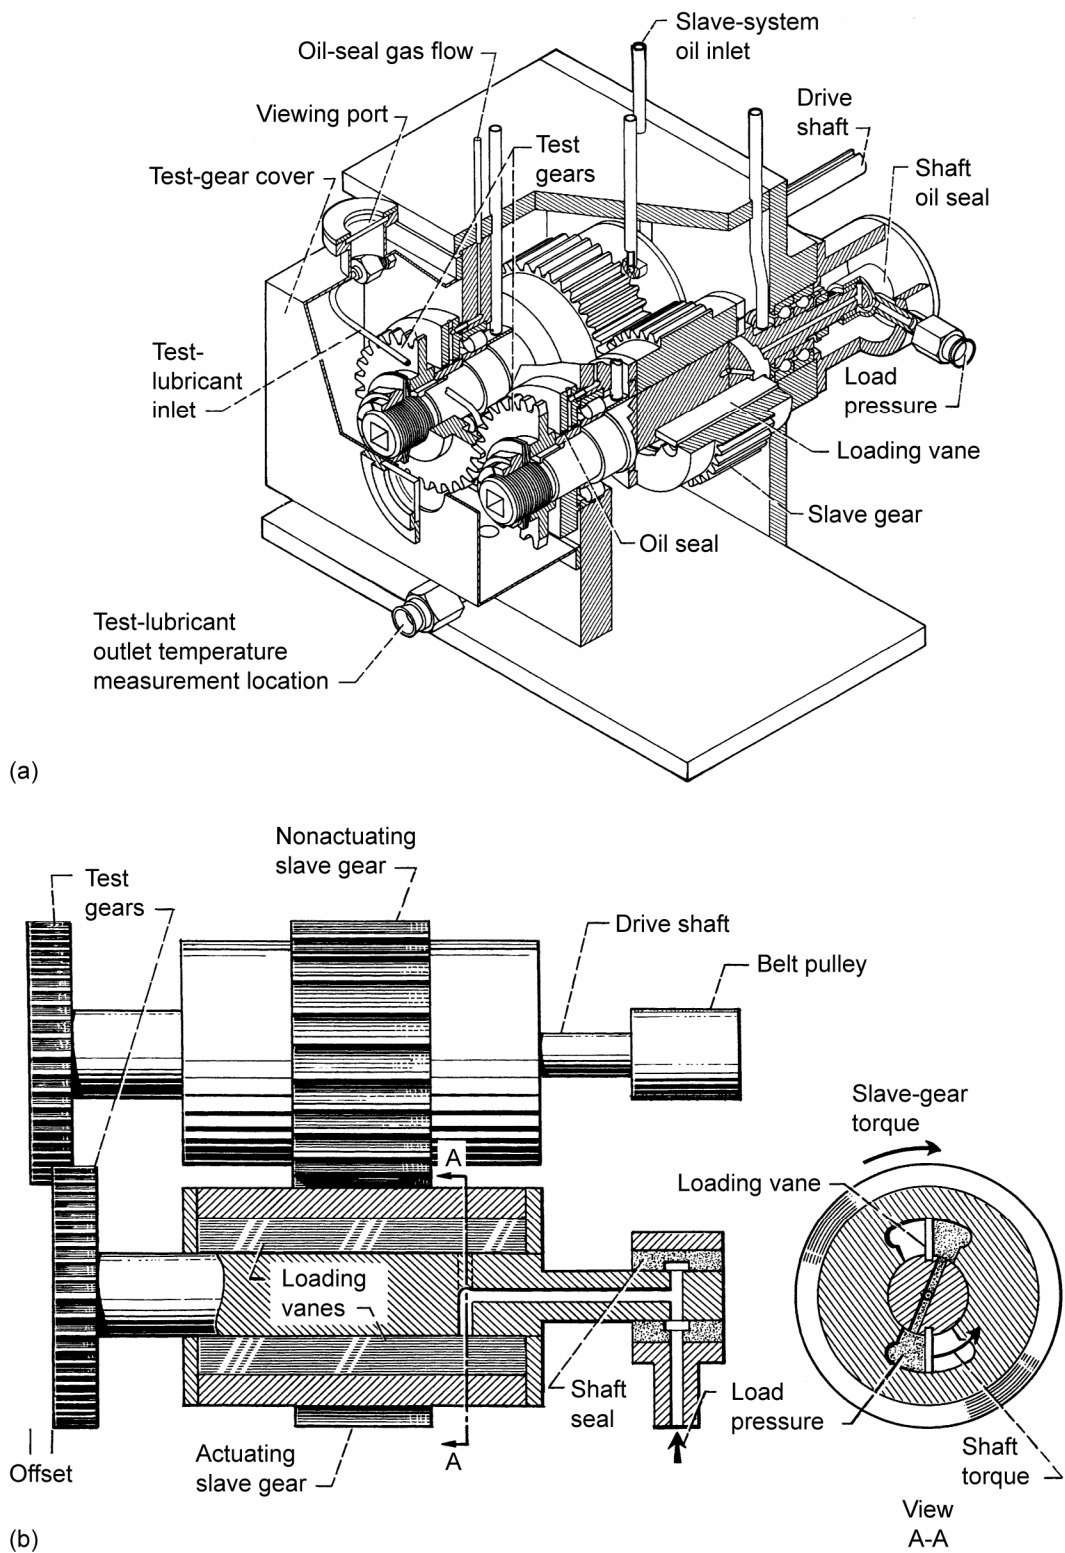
NASA Glenn Research Center gear fatigue test apparatus. (a) Cutaway view. (b) Schematic view.
